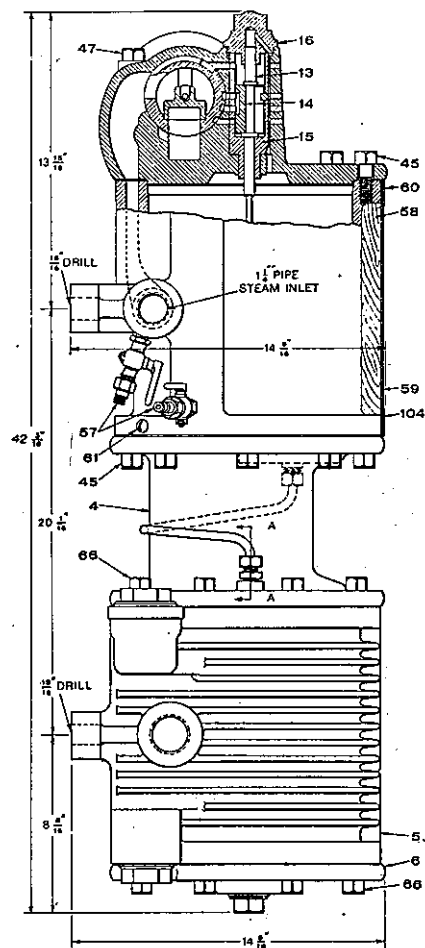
9 1/2" Air Compressor outline view with section through the Reversing Valve
